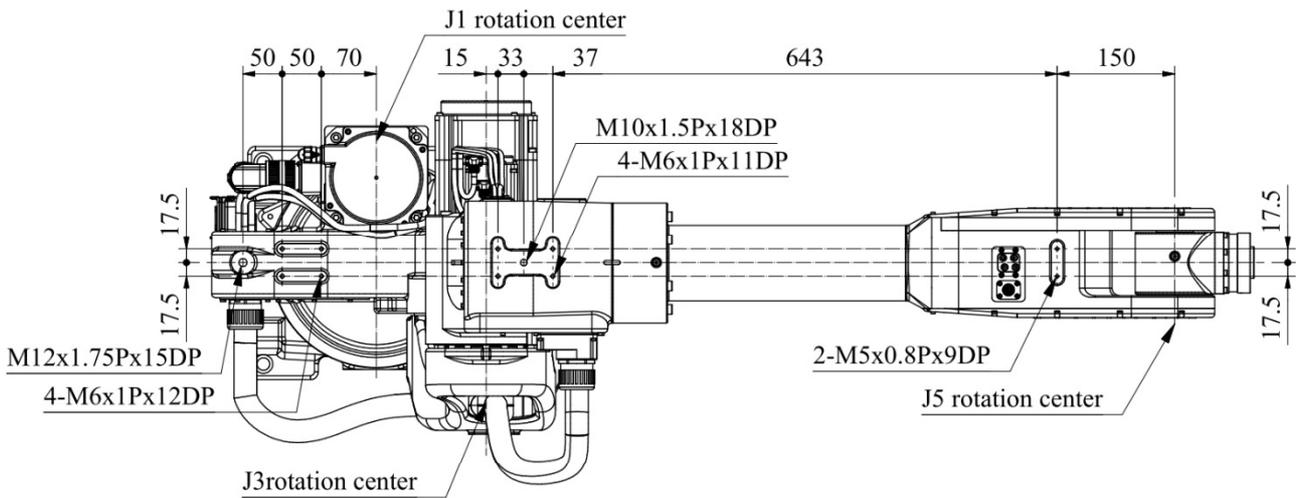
(d) RA610-1672-GA Mounting surfaces on the robot
